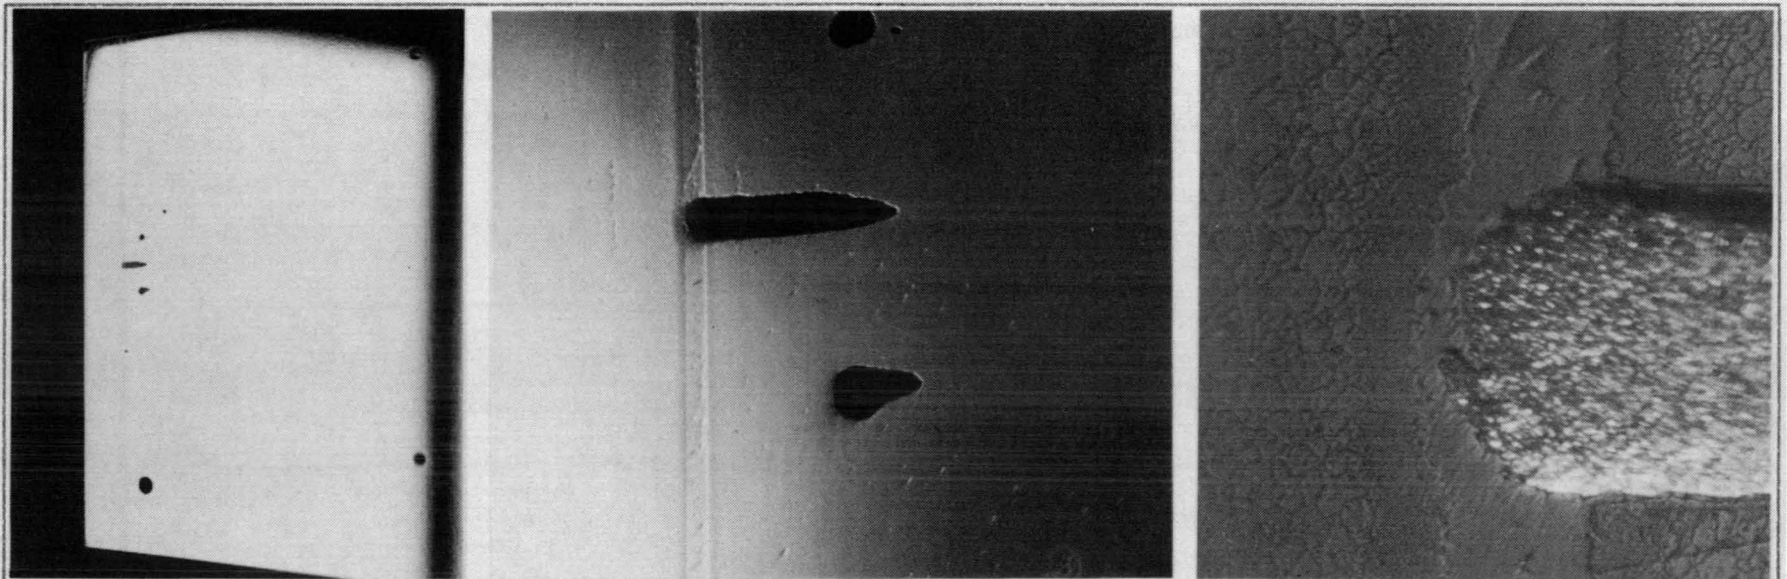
(left) Segment 3M polished to give taper section through bond line. Fig 4d(center) X10 view of taper section thru bond line & channels. Fig 4e (right) X70 view of center channel.
